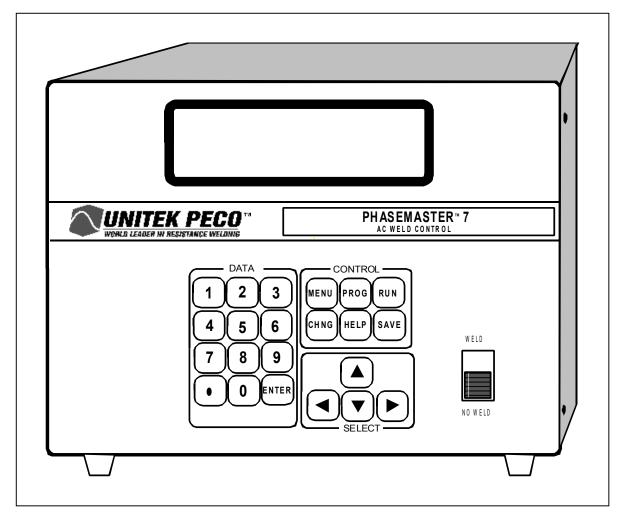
PM7 Direct Energy Welding Control
